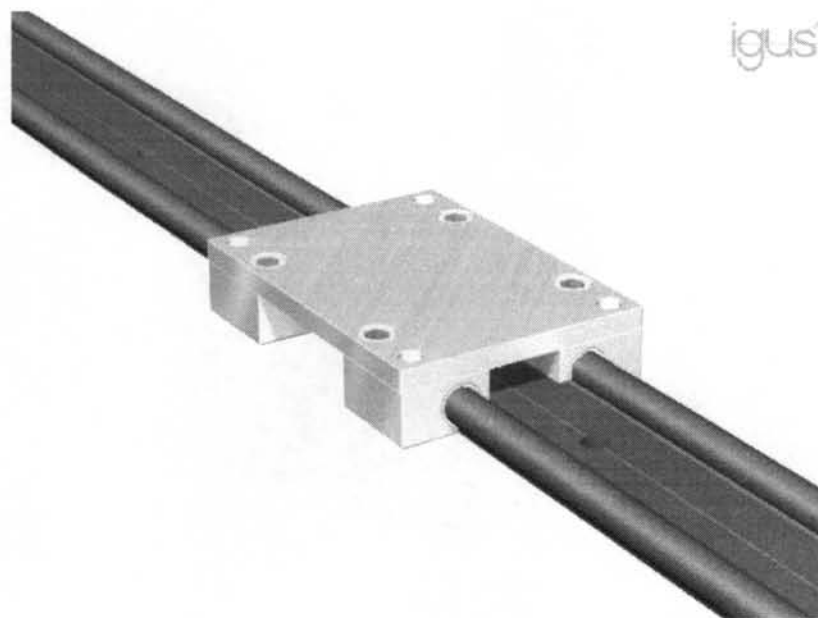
Igus Drylin W Slide Rail (CAD Drawing)
